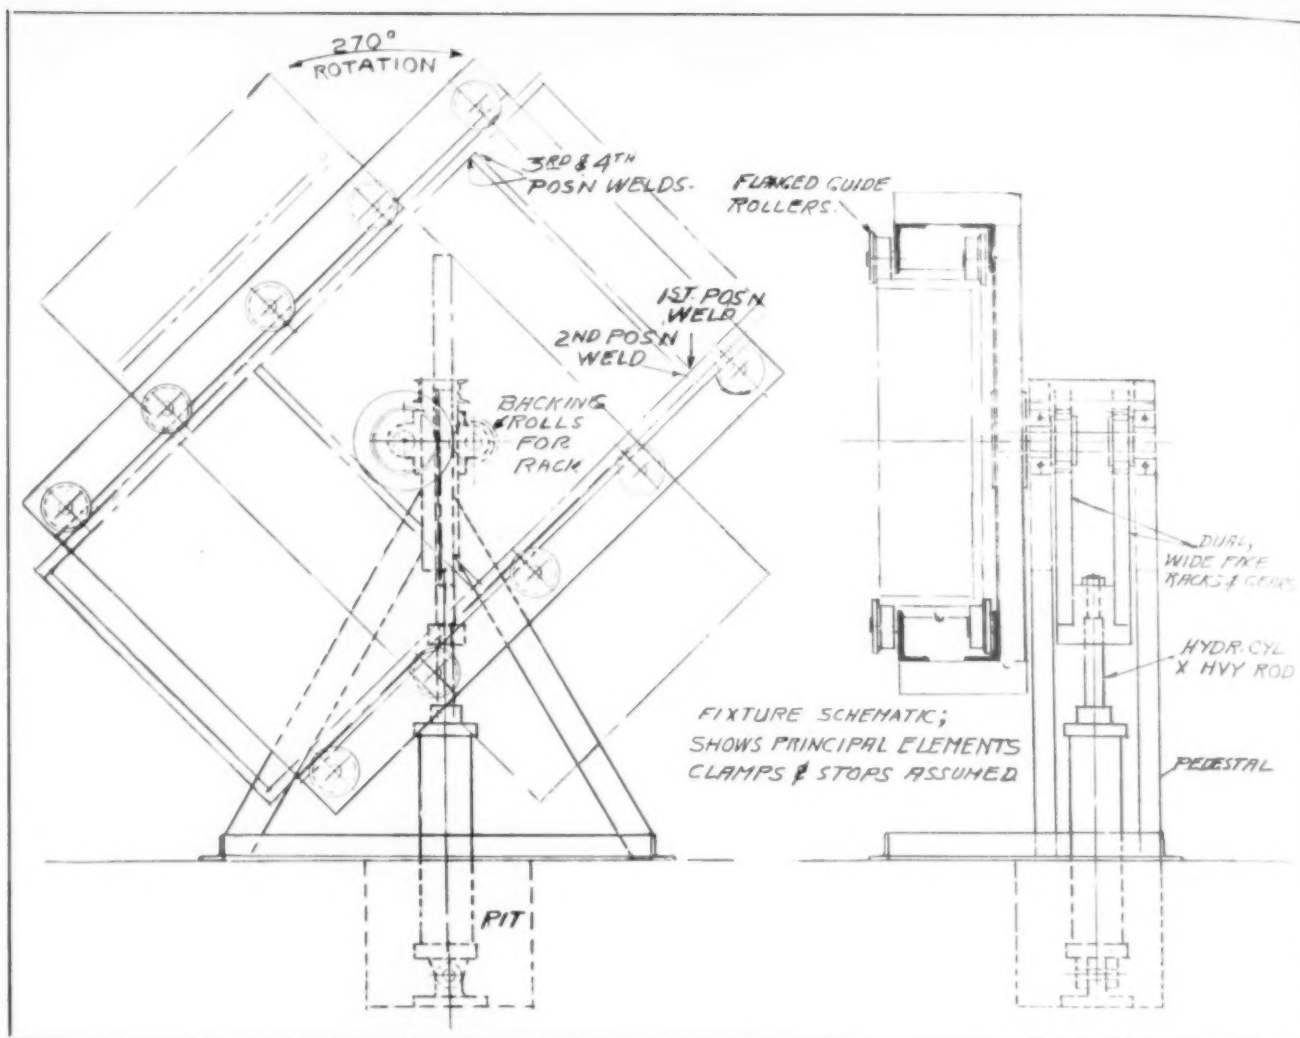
Positioner used to weld side fillets in job shown in Figure 9.
